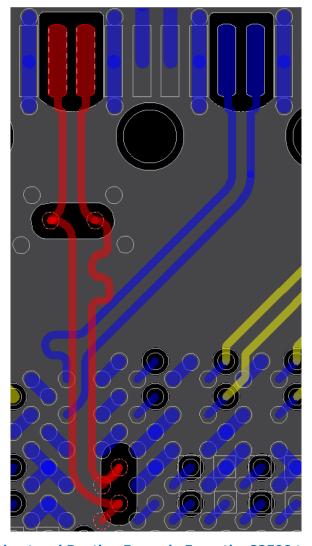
SFI+ Breakout and Routing Example From the 82599 to SFI+ Connector Pad
